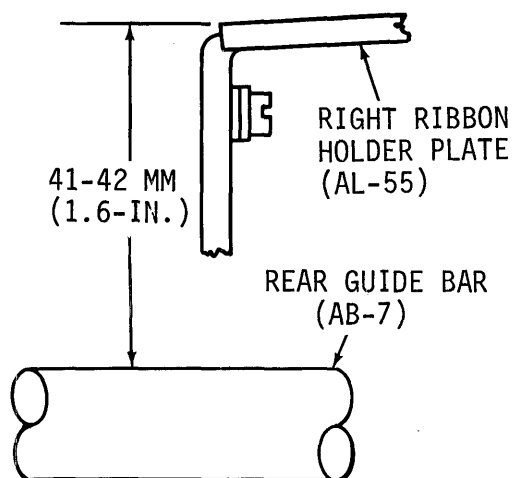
LOCATING DIMENSION FOR RIGHT RIBBON HOLDER PLATE WITH RESPECT TO REAR GUIDE BAR
